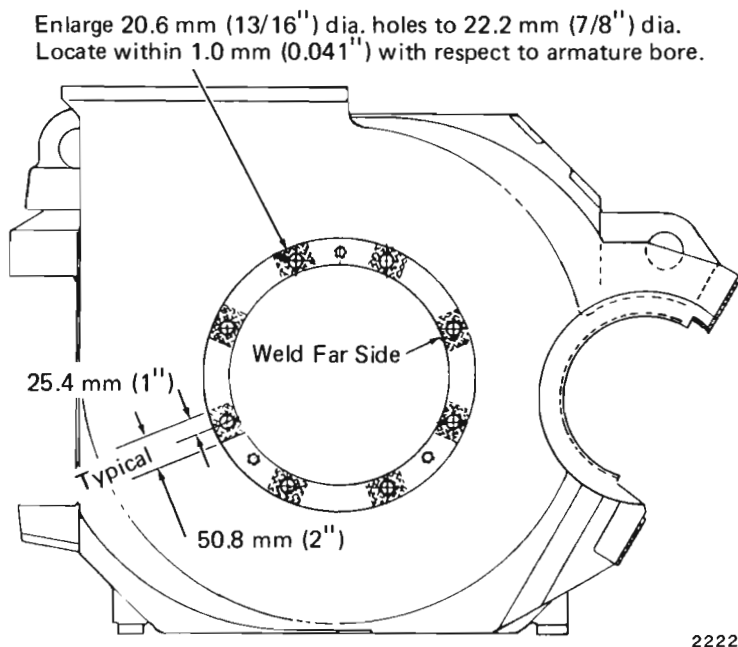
Commutator End Armature Housing Bore Face Welding
